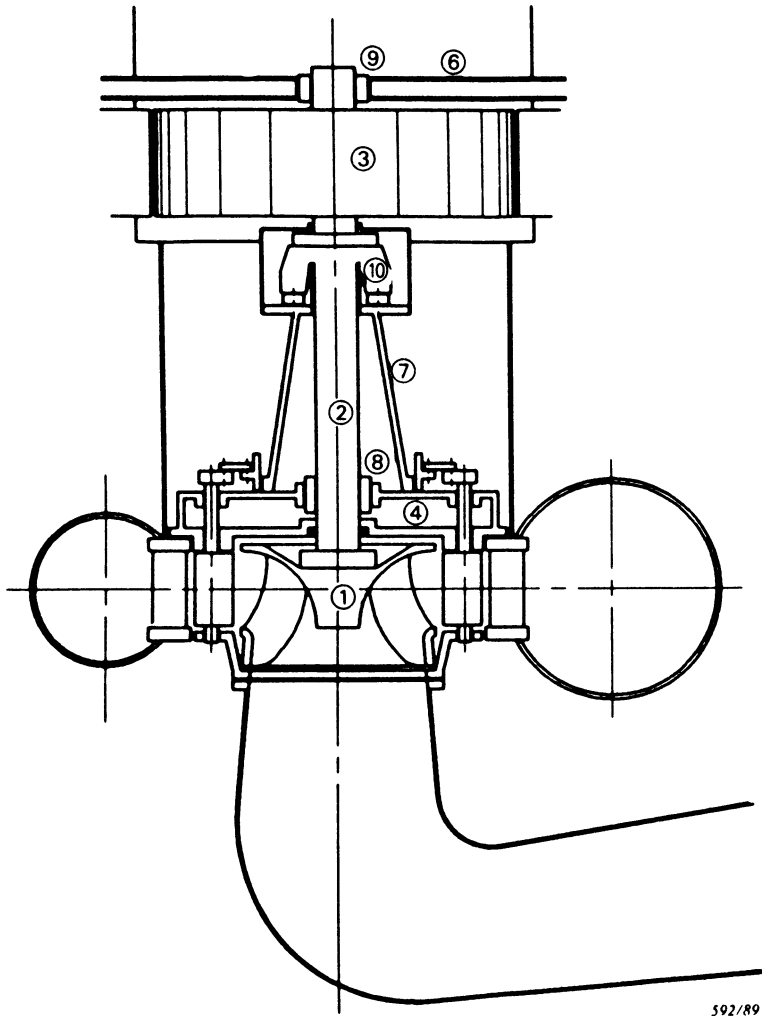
Example of a vertical machine (Francis turbine) of umbrella-type with the thrust bearing on the head cover and two guide bearings
